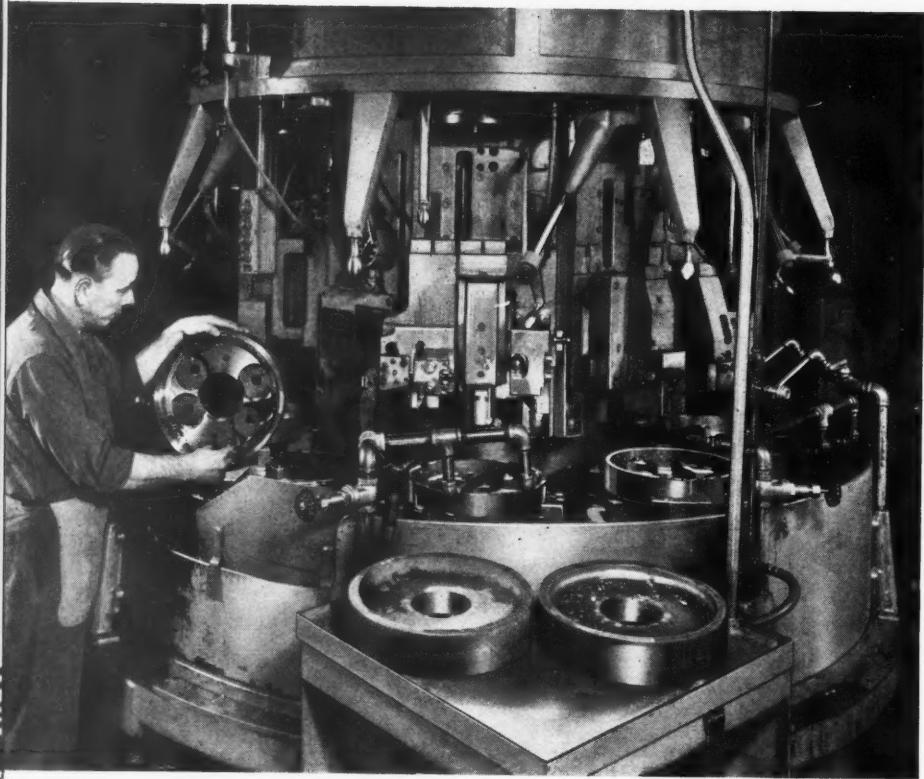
Steel forgings weighing 95 pounds are turned, bored, faced, and grooved on an eight-spindle Mult-Au-Matic. Finished parts weigh only 37 pounds.
